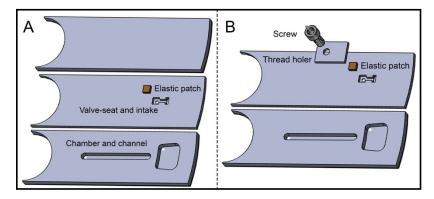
Disc with TER or FER valves can be mass manufactured by binding of three inject-molded discs (A), or assembly of two discs with separately fabricated valves (B).
